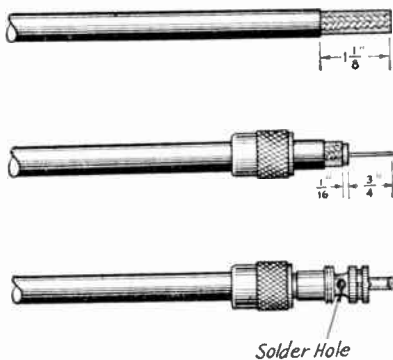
Dimensions for stripping 1/2-inch cable to fit Amphenol Type 83-1SP (PI-259) plug.
